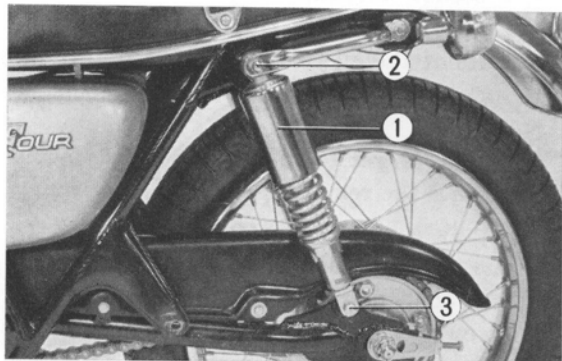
① Rear suspension ② Nut ③ Bolt
